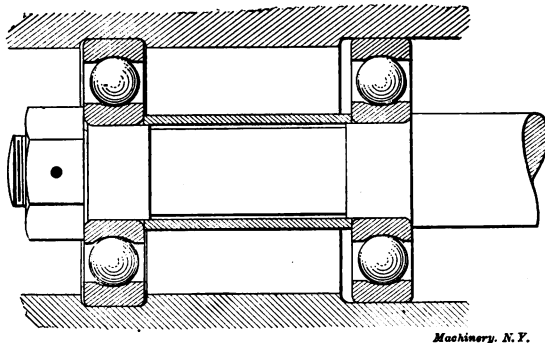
Radial Bearings Arranged to take Axial Thrust
